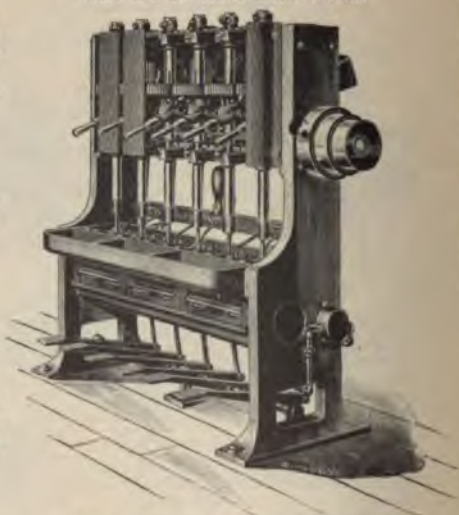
SHOWS SIX SPINDLE MACHINE.
